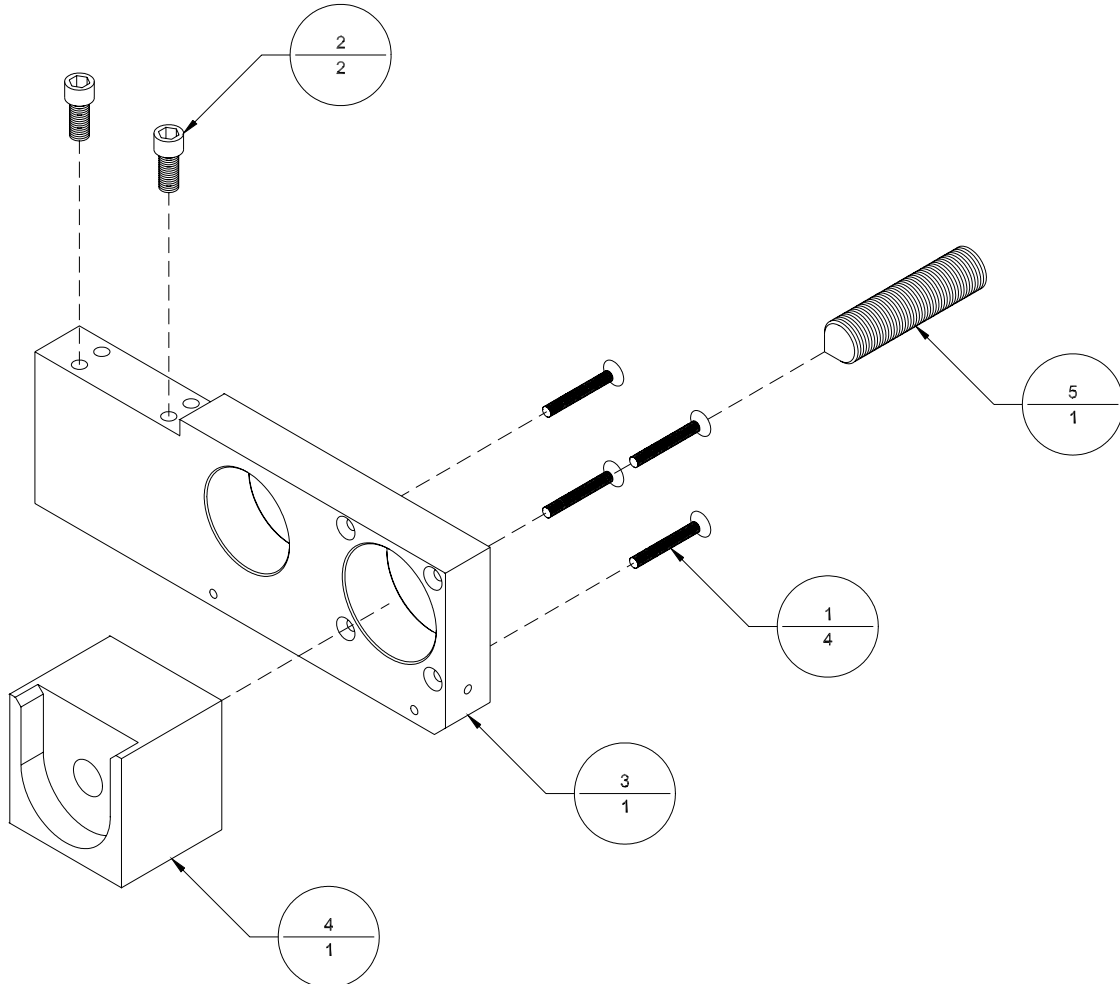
Locking Mechanism – Left (9100760LA)
